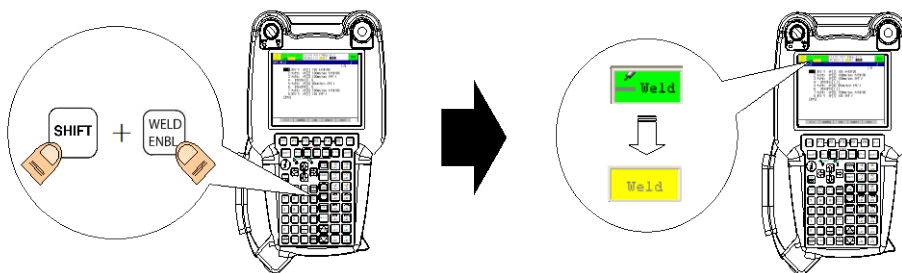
(f) Switch to Weld Disabled
